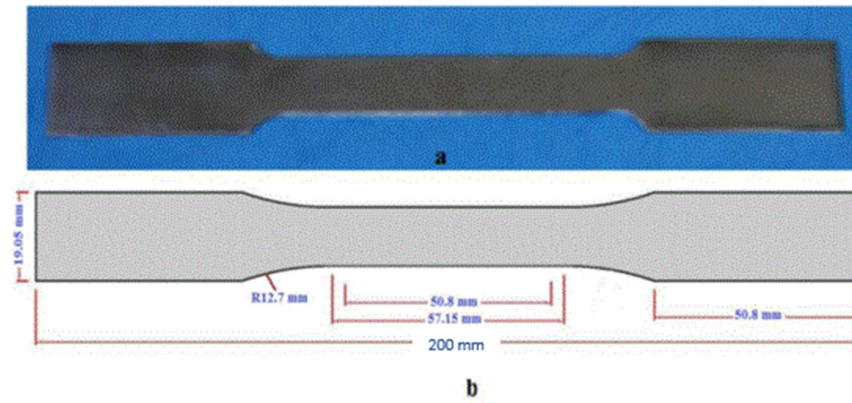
ASTM: E8/8M Standard dimensions for tensile test specimens: (a) real & (b) schematic of the tensile test specimens.
